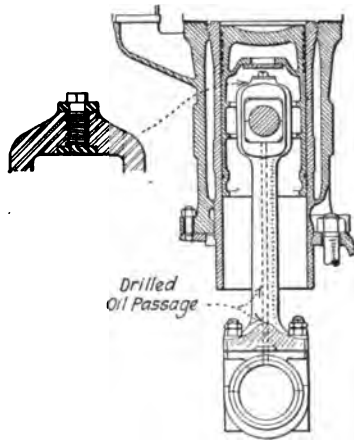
Busch-Sulzer Diesel connecting-rod.
